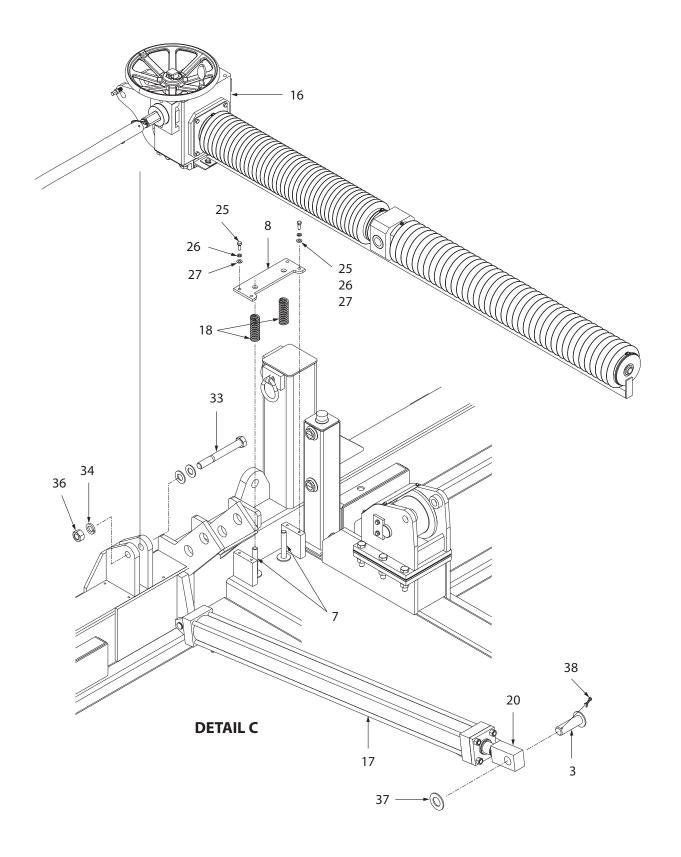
AGSE-E18401-S01 Base Assembly
